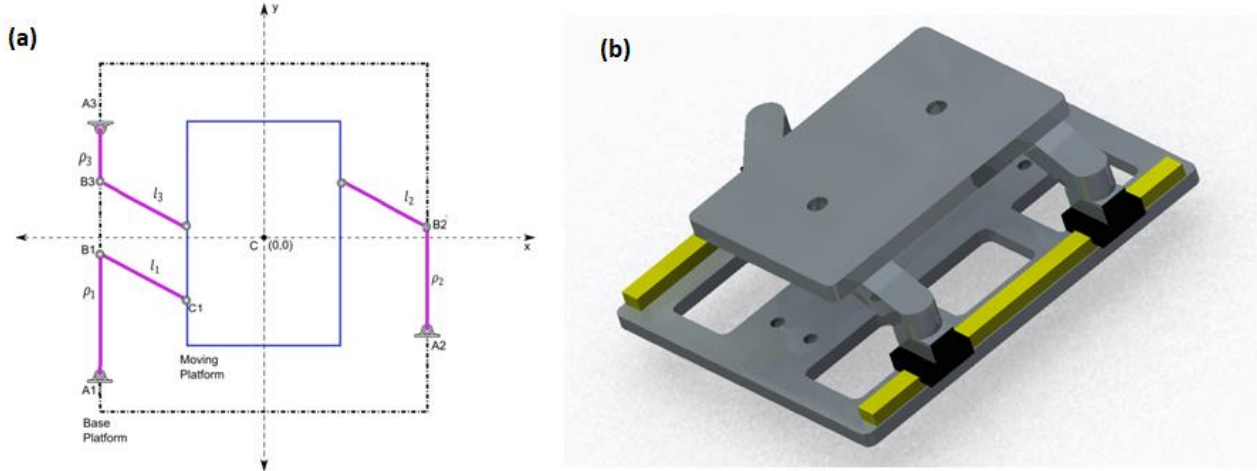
(a) Scheme of the realized 3-PRR mechanism (b) CAD Model of the 3PRR mechanism
